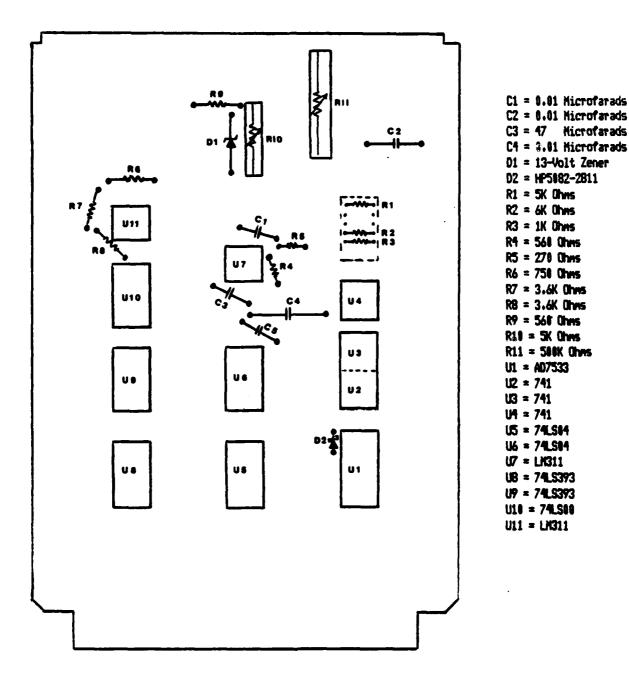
VIDEO DETECTION AND THRESHOLDING CIRCUIT BOARD LAYOUT
